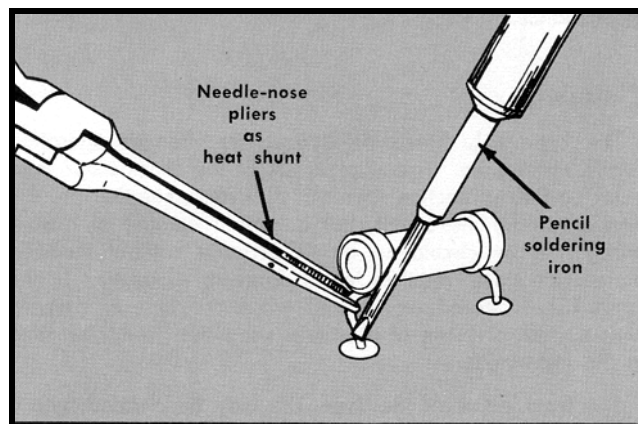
Apply soldering iron to the heat-shunted lead when removing a component from an etched-wiring board.
